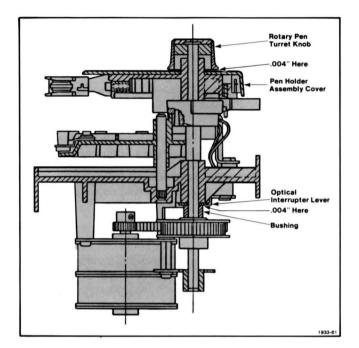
Setting Lower Bushing and Knob Clearances.
